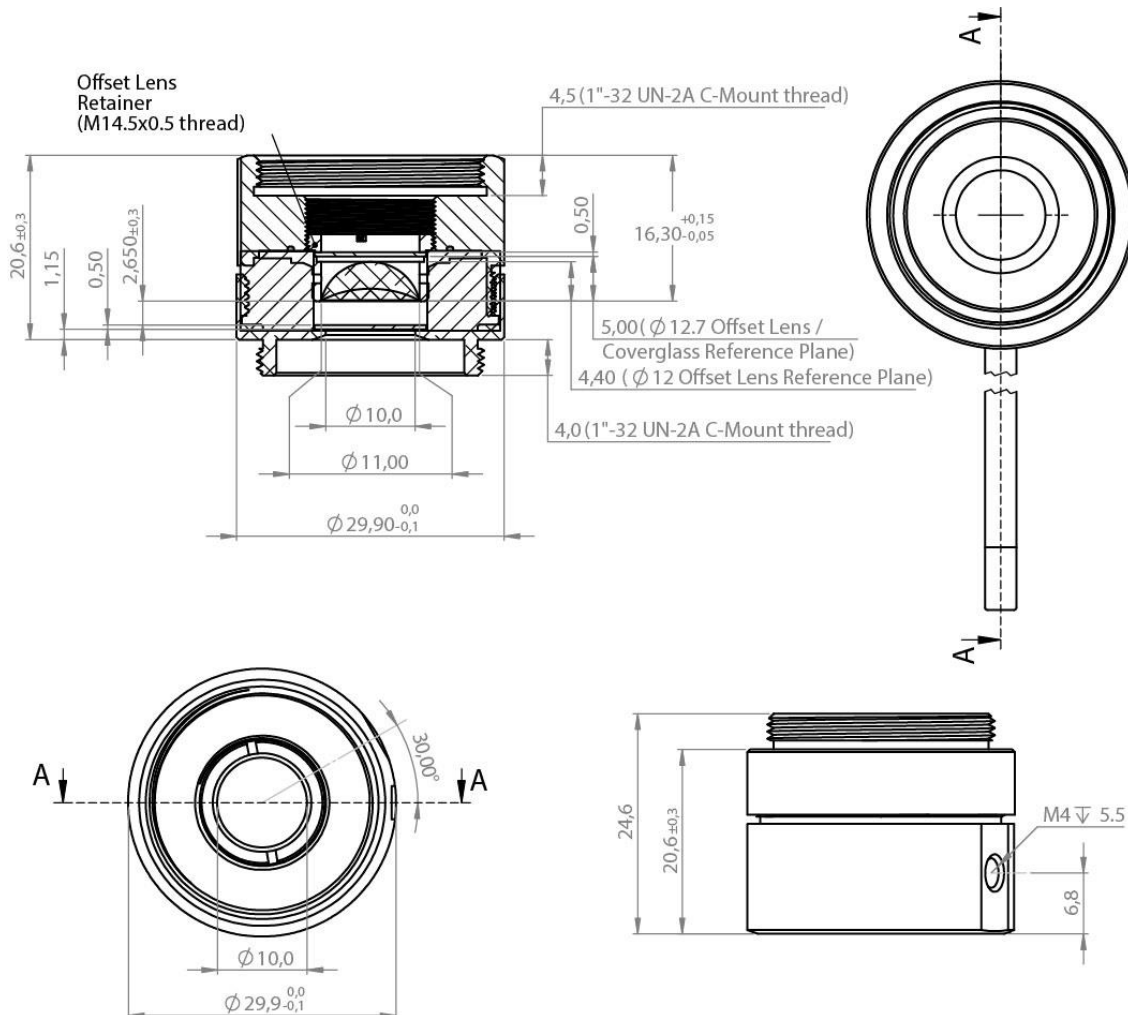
Mechanical drawing of the EL-10-30-C (unit: mm). The lower panel shows the position of the M4 threaded hole for mounting of the EL-10-30-C
